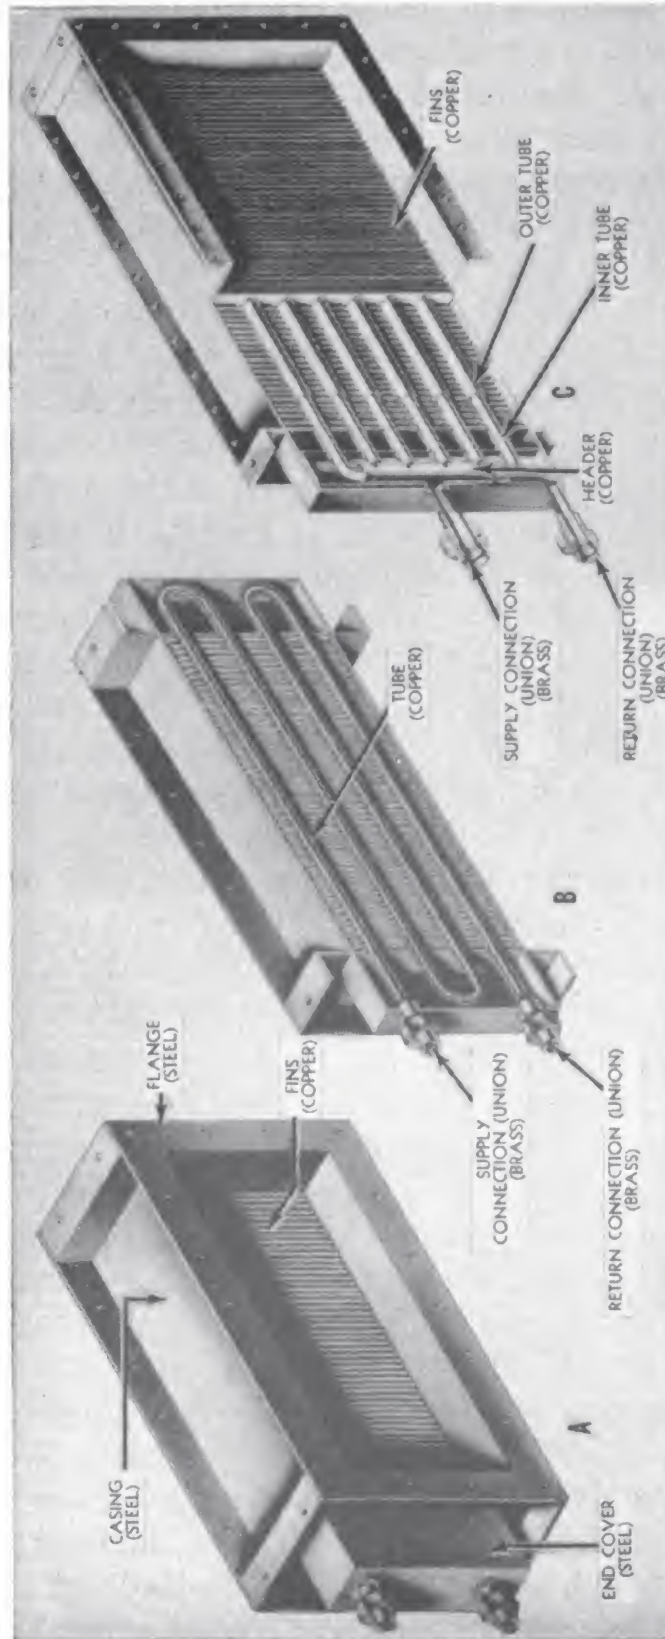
Ventilation heaters: (A) exterior view of S-type heater; (B) tube arrangement of S-type heater; and (C) tube arrangement of T-type heater.
